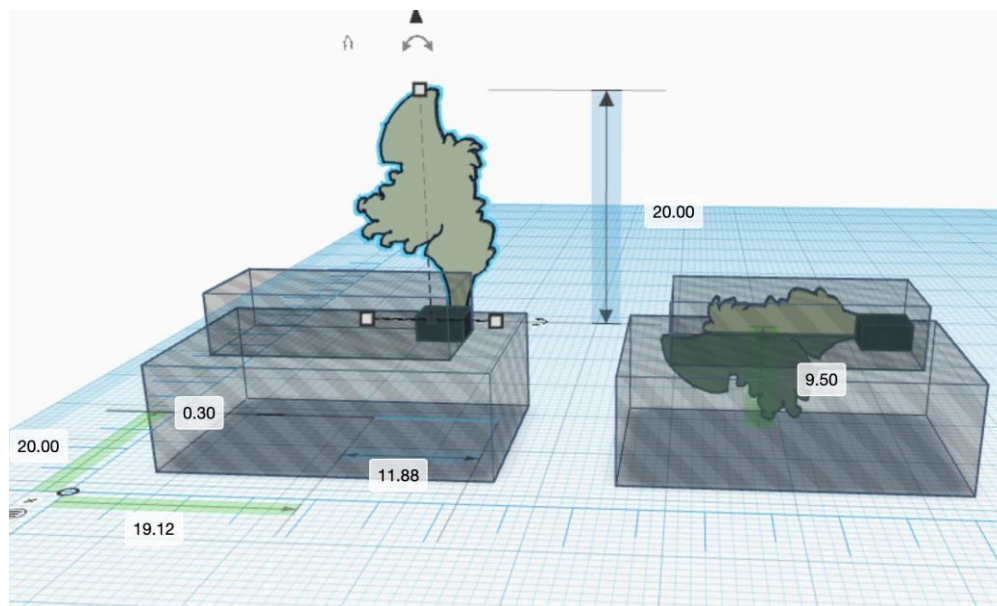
CAD Design of Chassis, Motor, and Hatter Figure
